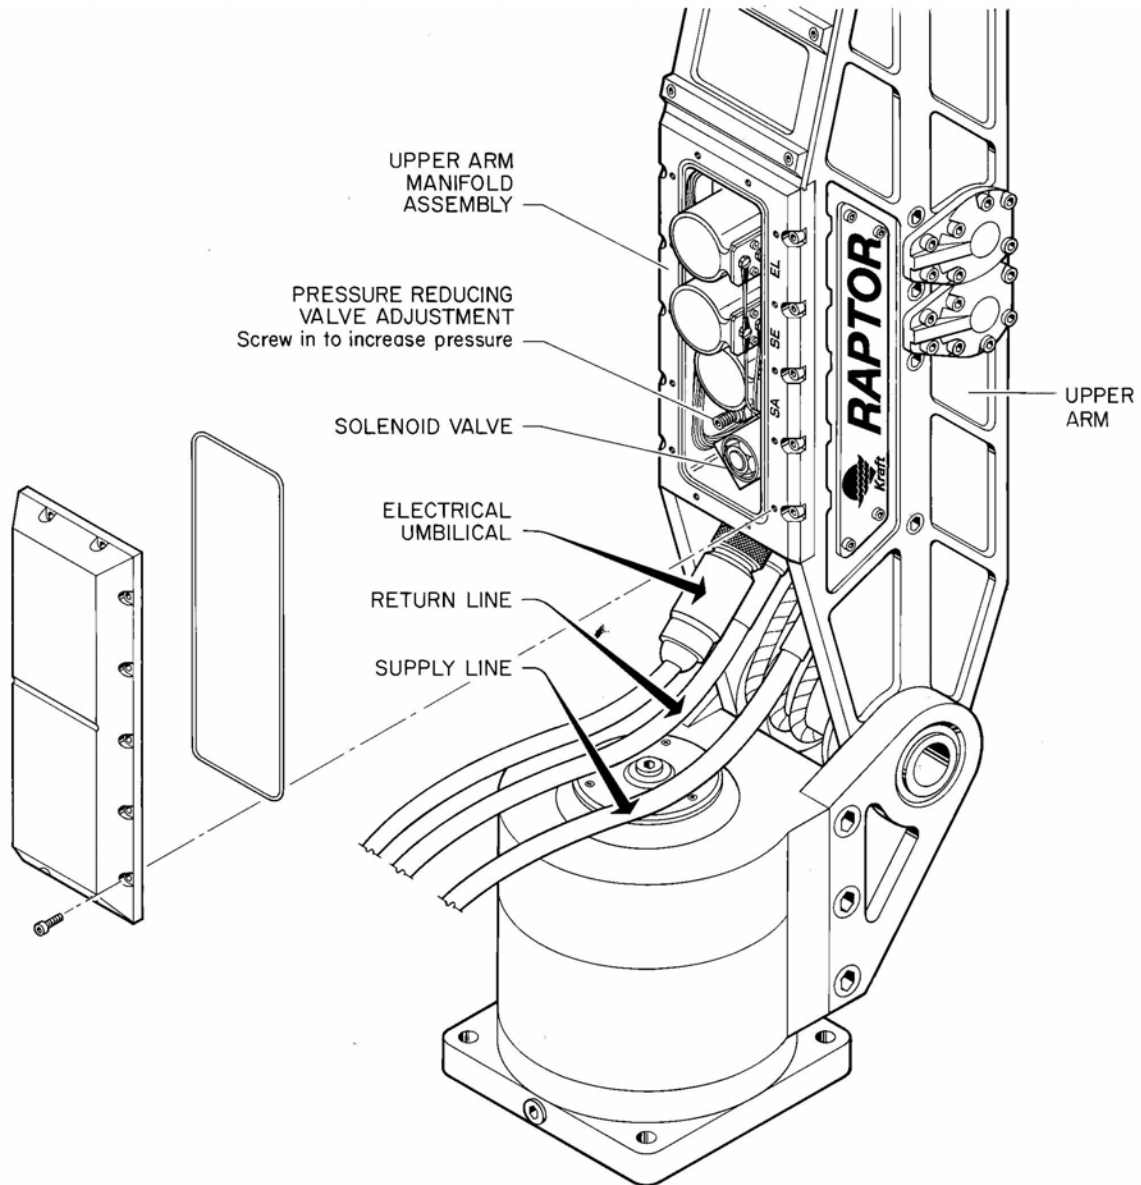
Raptor* Slave Arm Electrical and Hydraulic Connections
